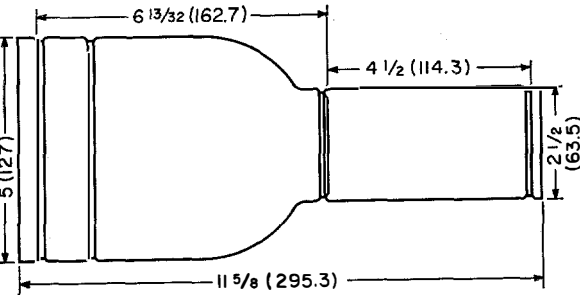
Outside dimensions of the 5-inch (127-millimeter) electric-field-deflection Iatron Ia10P20-25.
